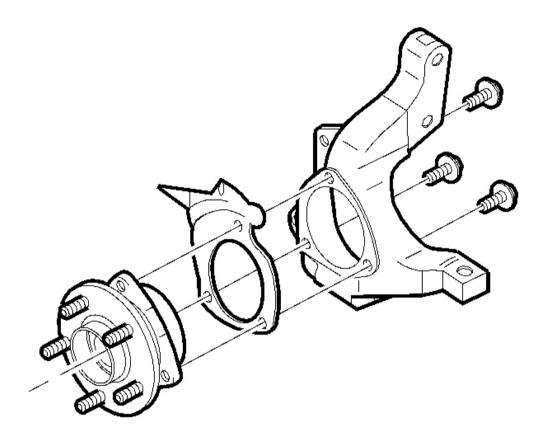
Wheel Bearing/Hub & Mounting Bolts Courtesy of GENERAL MOTORS CORP.
